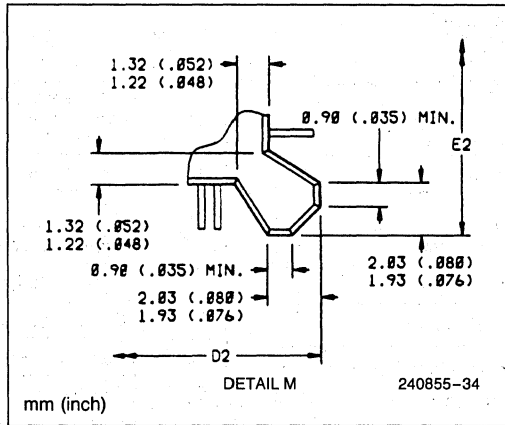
132-Lead PQFP Mechanical Package Detail—Protective Bumper
